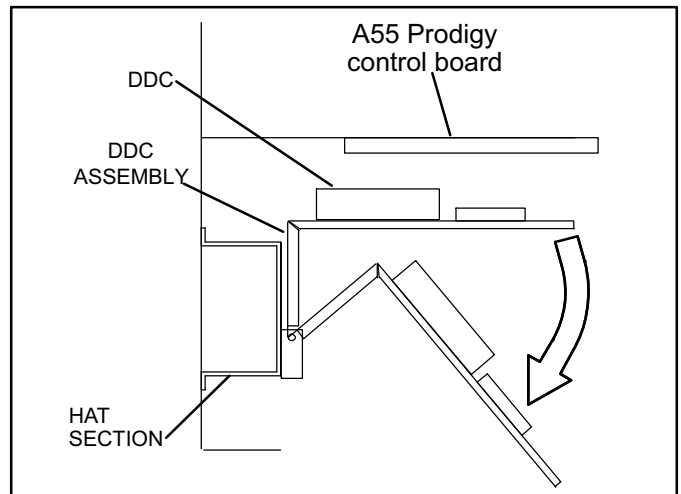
240 Units - Attaching DDC Hinged Mounting Panel to Hat Section
